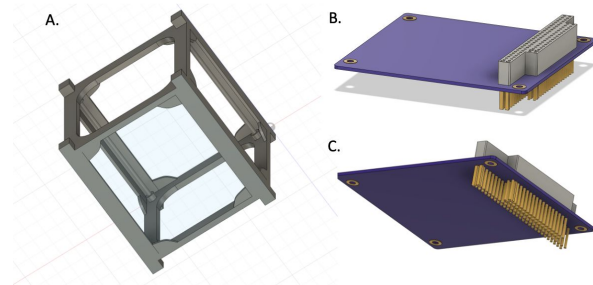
A. chassis structure B. top view of PCB C. bottom view of PCB
